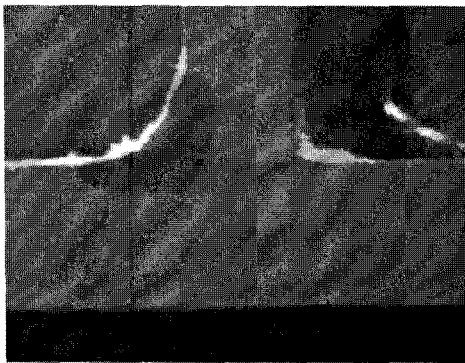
Section of welded circular-rectangular pipes.
